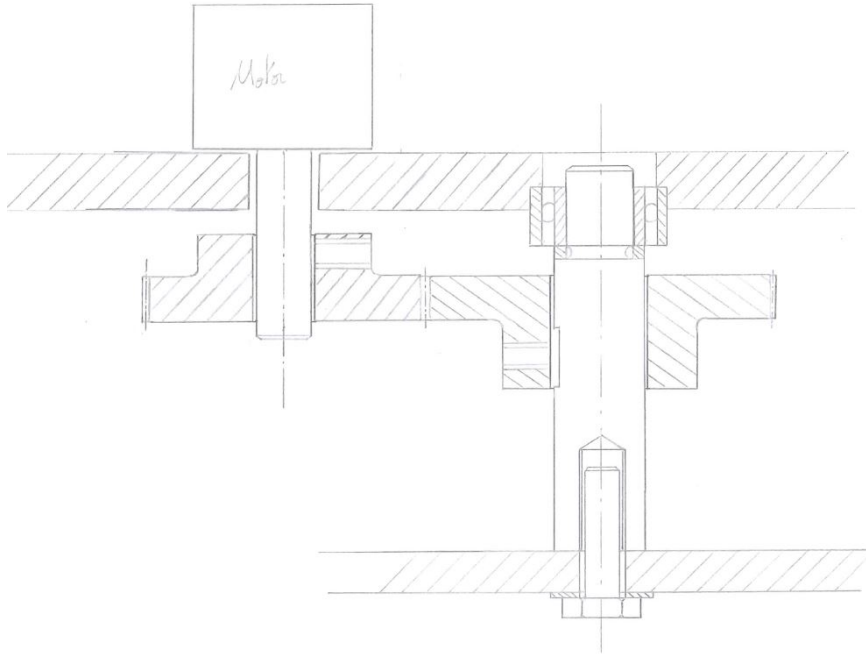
Technical drawing of the shaft at the top of the gimbal screwed to the frame. It is maintained and aligned by a ball bearing on this side and a gear attached with a clamping screw transmit the torque from the actuator. An adjustment disk is also used.
